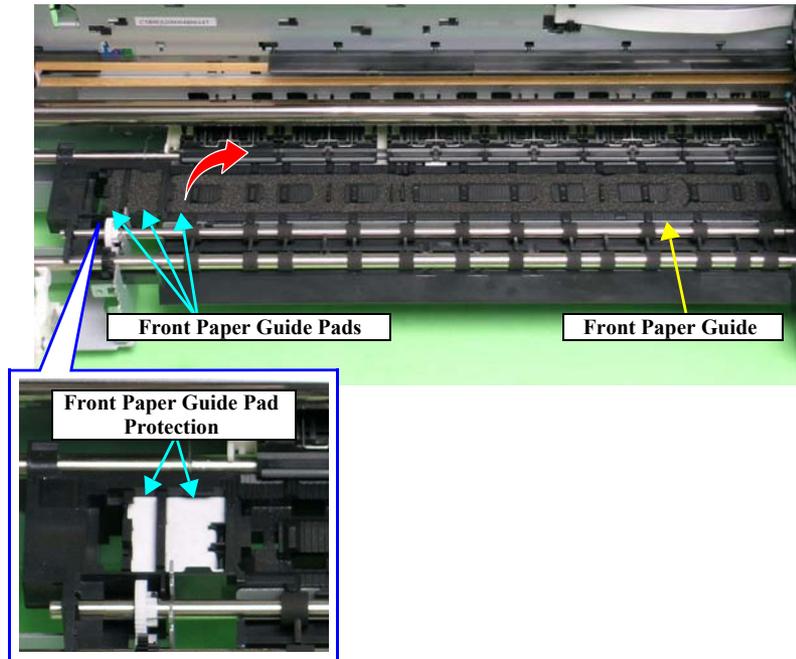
Removing the Front Paper Guide Pads and the Front Paper Guide Pad Protection
